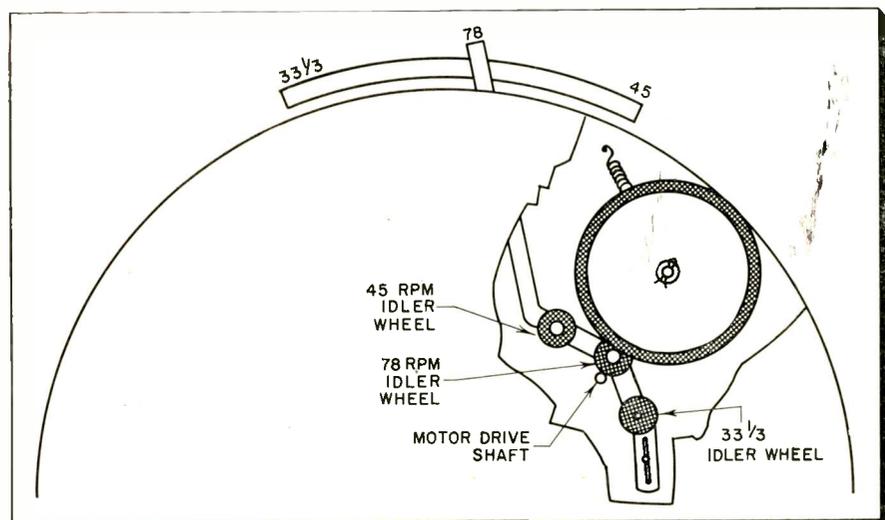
Three-speed drive assembly showing separate idlers mounted on selector lever.
